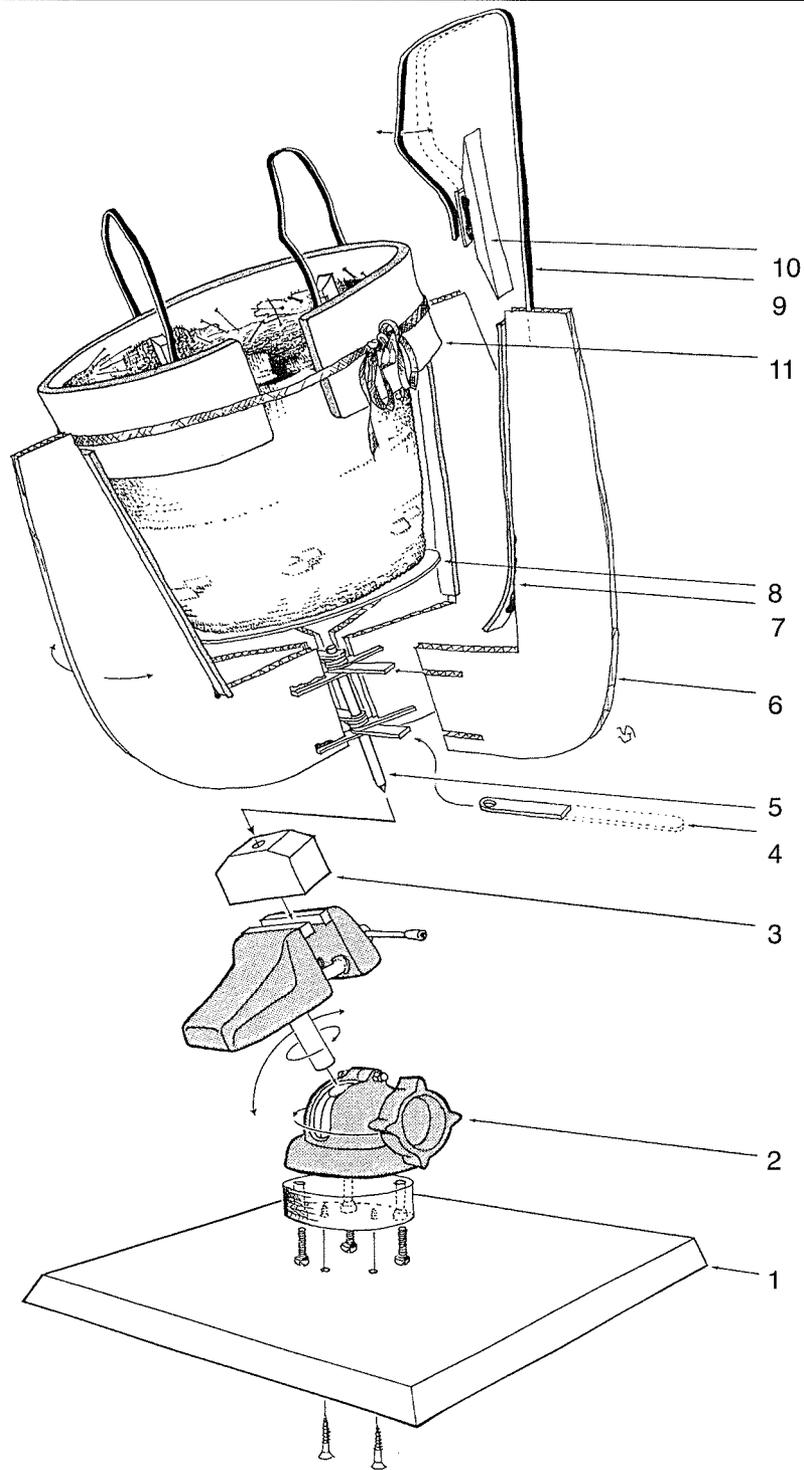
Detailed drawing of a clamping assembly using the same type of spring wire clamp as in Figures 30 and 31. Note how a basket is attached to the mount and spring clamps are used to apply pressure: 1, wood base; 2, universal vise; 3, wood block; 4, wood dowel; 5, flat wood stick (tongue depressor); 6, fluted plastic sheet; 7 and 8, polyethylene foam padding attached with hot-melt glue; 9, spring steel strip; 10, styrene foam pressure pad; 11, polyethylene foam padding attached with linen twill tape. (Courtesy of the Canadian Association for Conservation.)
